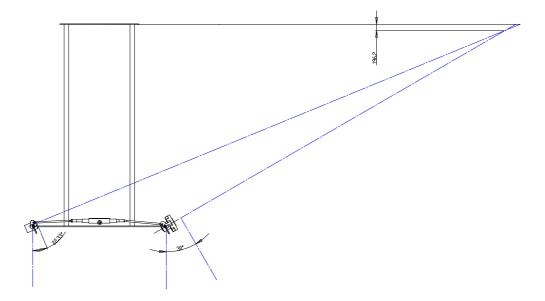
Model showing inside wheel at 30 degrees. Note also steering box location 50mm behind front axle line.
